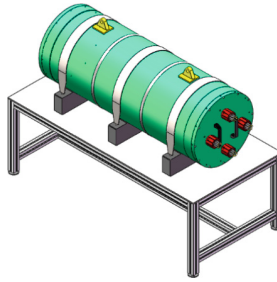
3D design drawing of pressure chamber of underwater charging station
